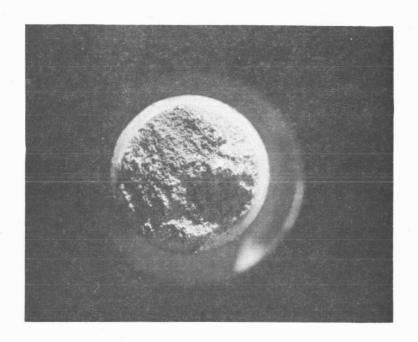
FRACTURE SURFACE, SPECIMEN 5, 8X
